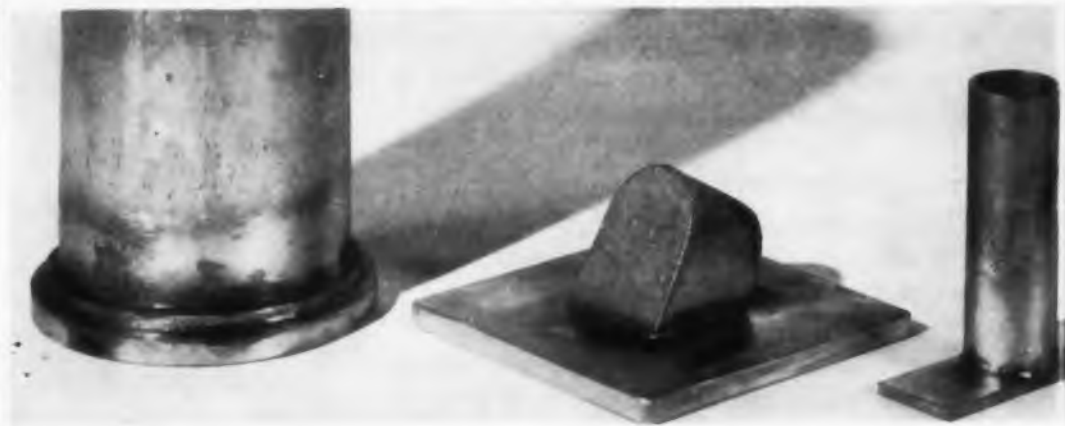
(above) Various shapes that have been soldered with excellent results. The center is a casting soldered to 6061 aluminum sheet.
